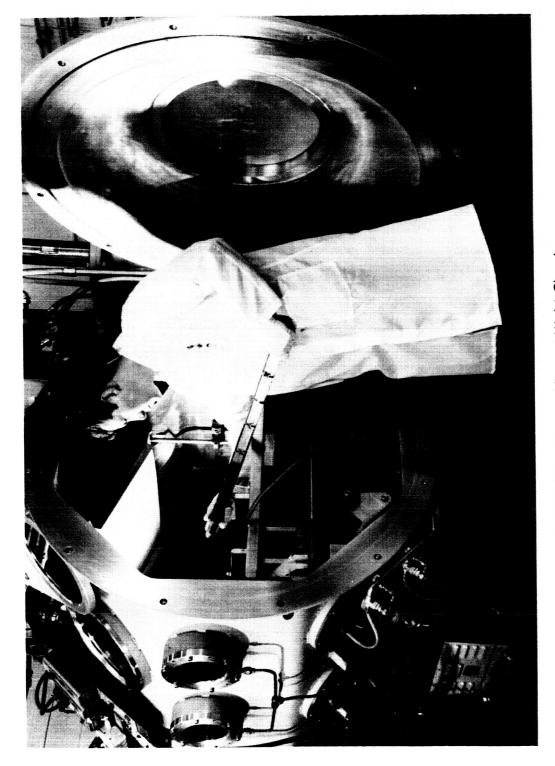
Vacuum Purged Weld Chamber
